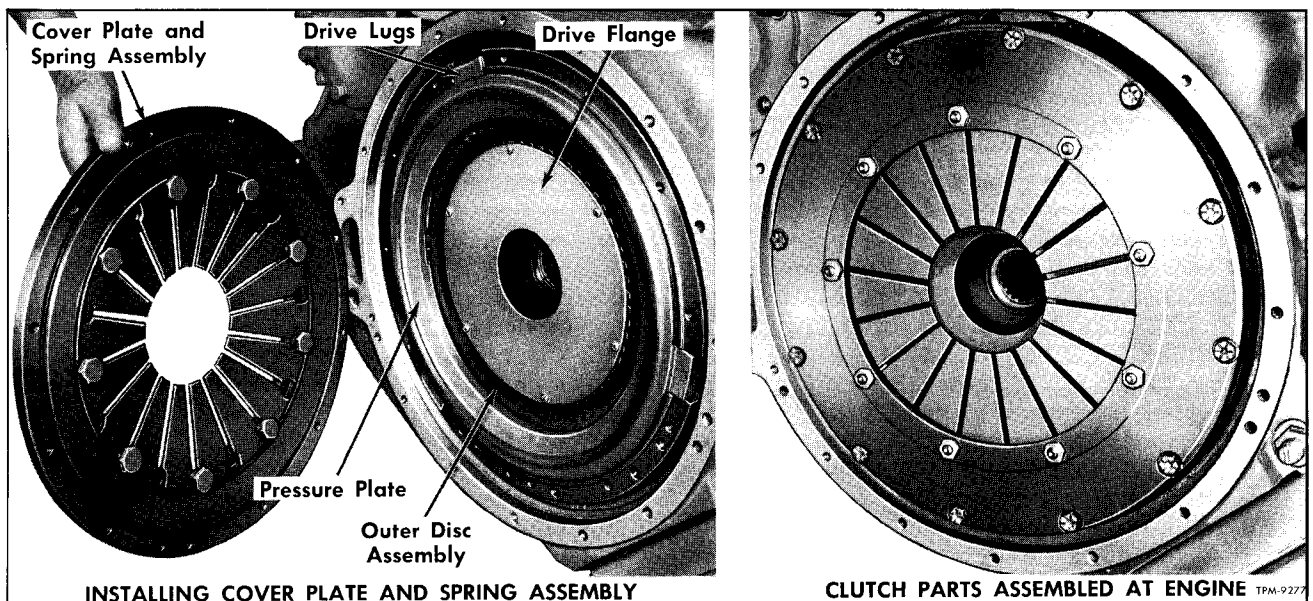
Installing Clutch Cover Plate and Spring Assembly
